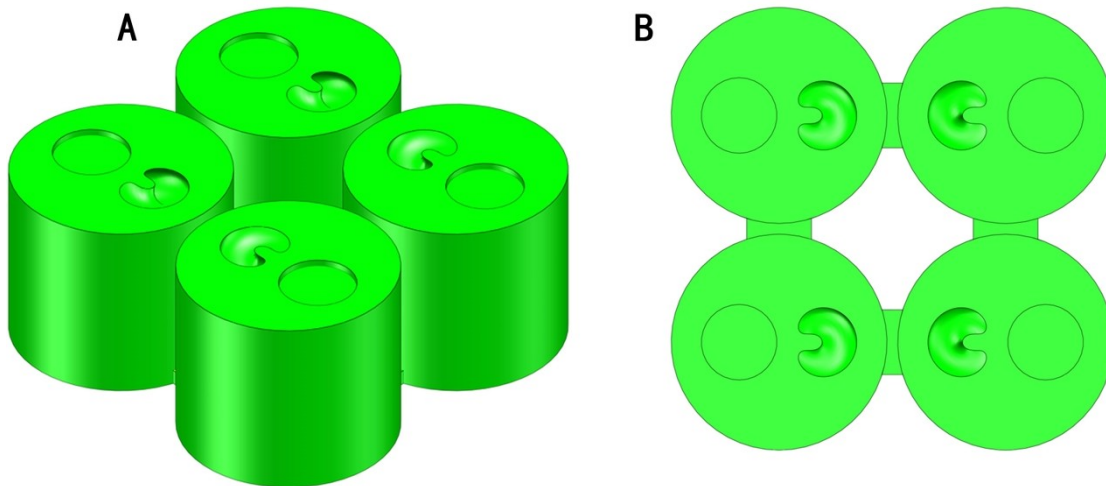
Spring-fixing cylinder connection of the metamaterial group. (A) Axonometric views. In order to match higher springs, cylindrical grooves are designed on the spring-fixing cylinder. (B) Top view.
